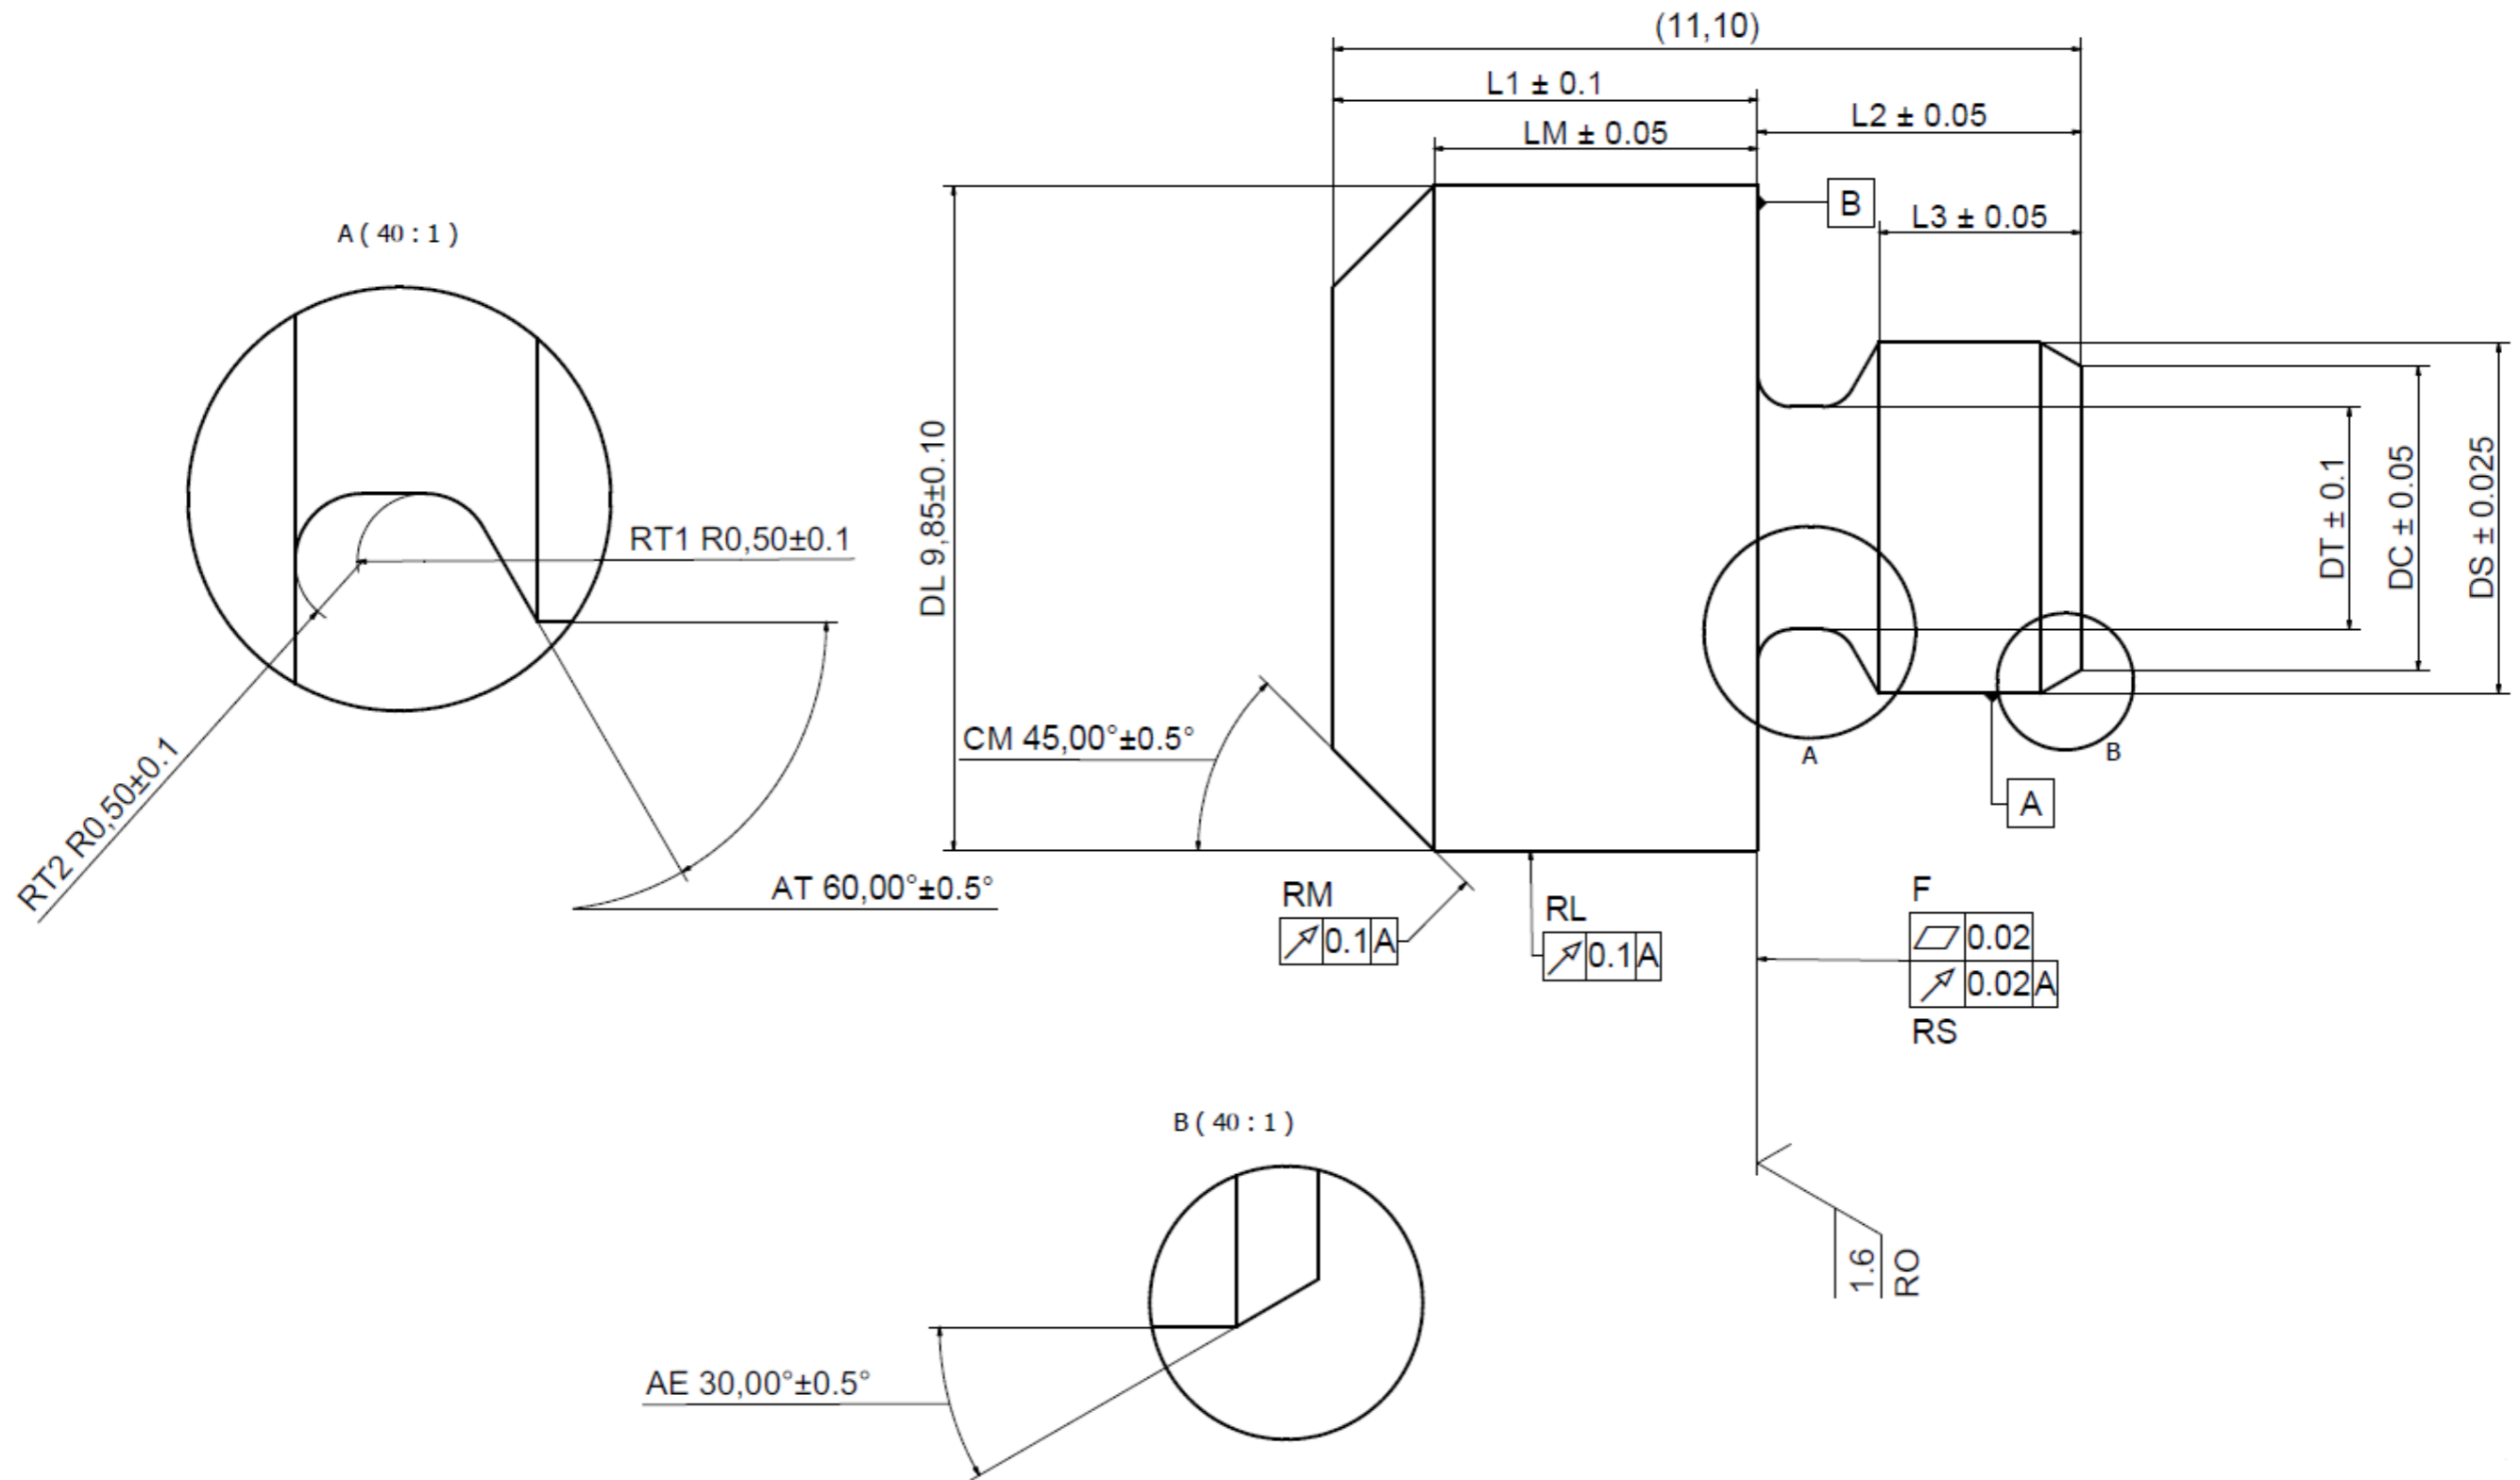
Side view dimensional drawing of the TEC (Not to Scale)
